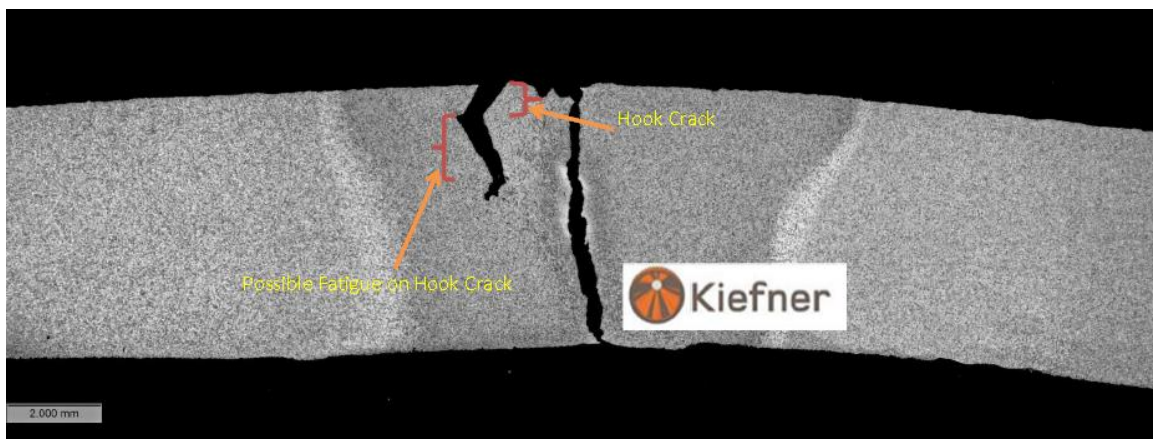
Example of Surface Breaking Hook Crack with Fatigue, Courtesy of KAI
